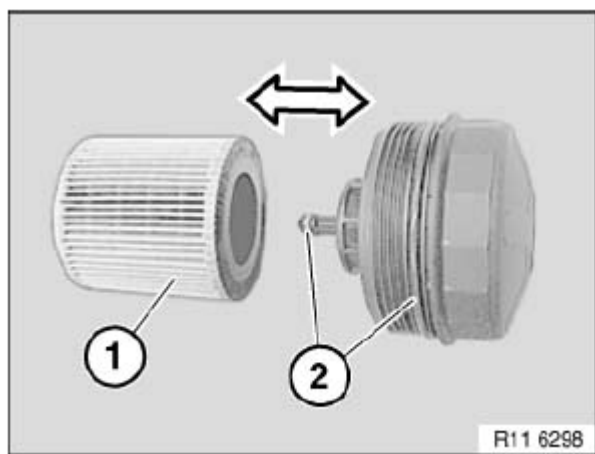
Identifying Oil Filter Element And Sealing Rings
